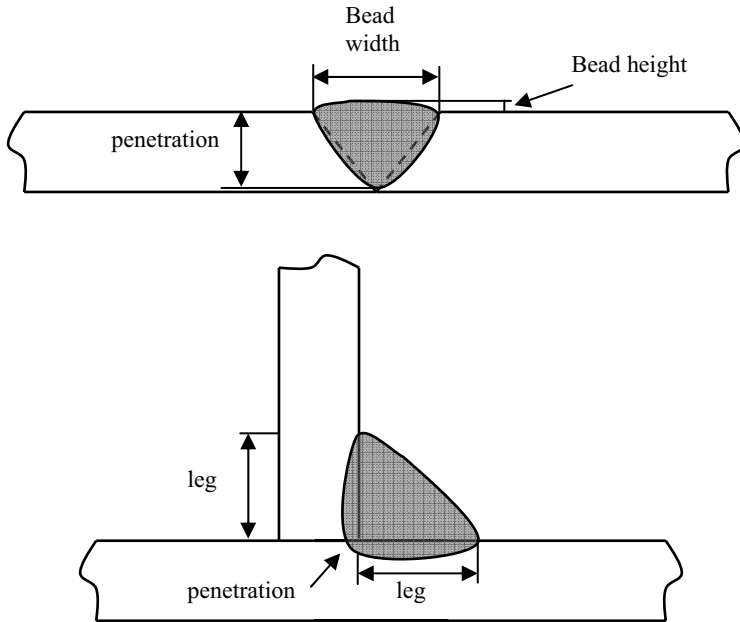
V-groove and fillet weld geometrical parameters
